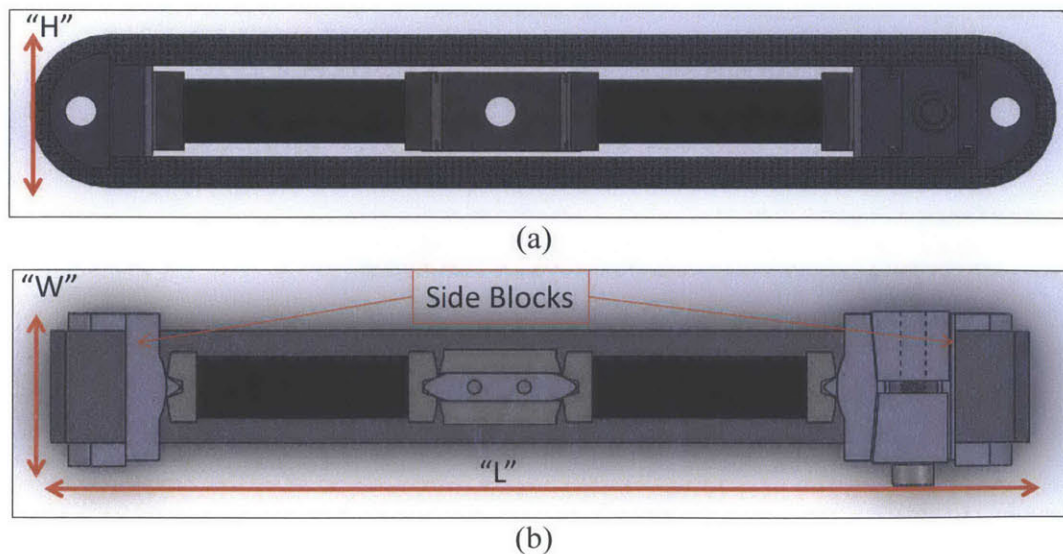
A side view (a) of the CFRP frame design indicating the tension structure, and a section view (b) showing the internal components.
